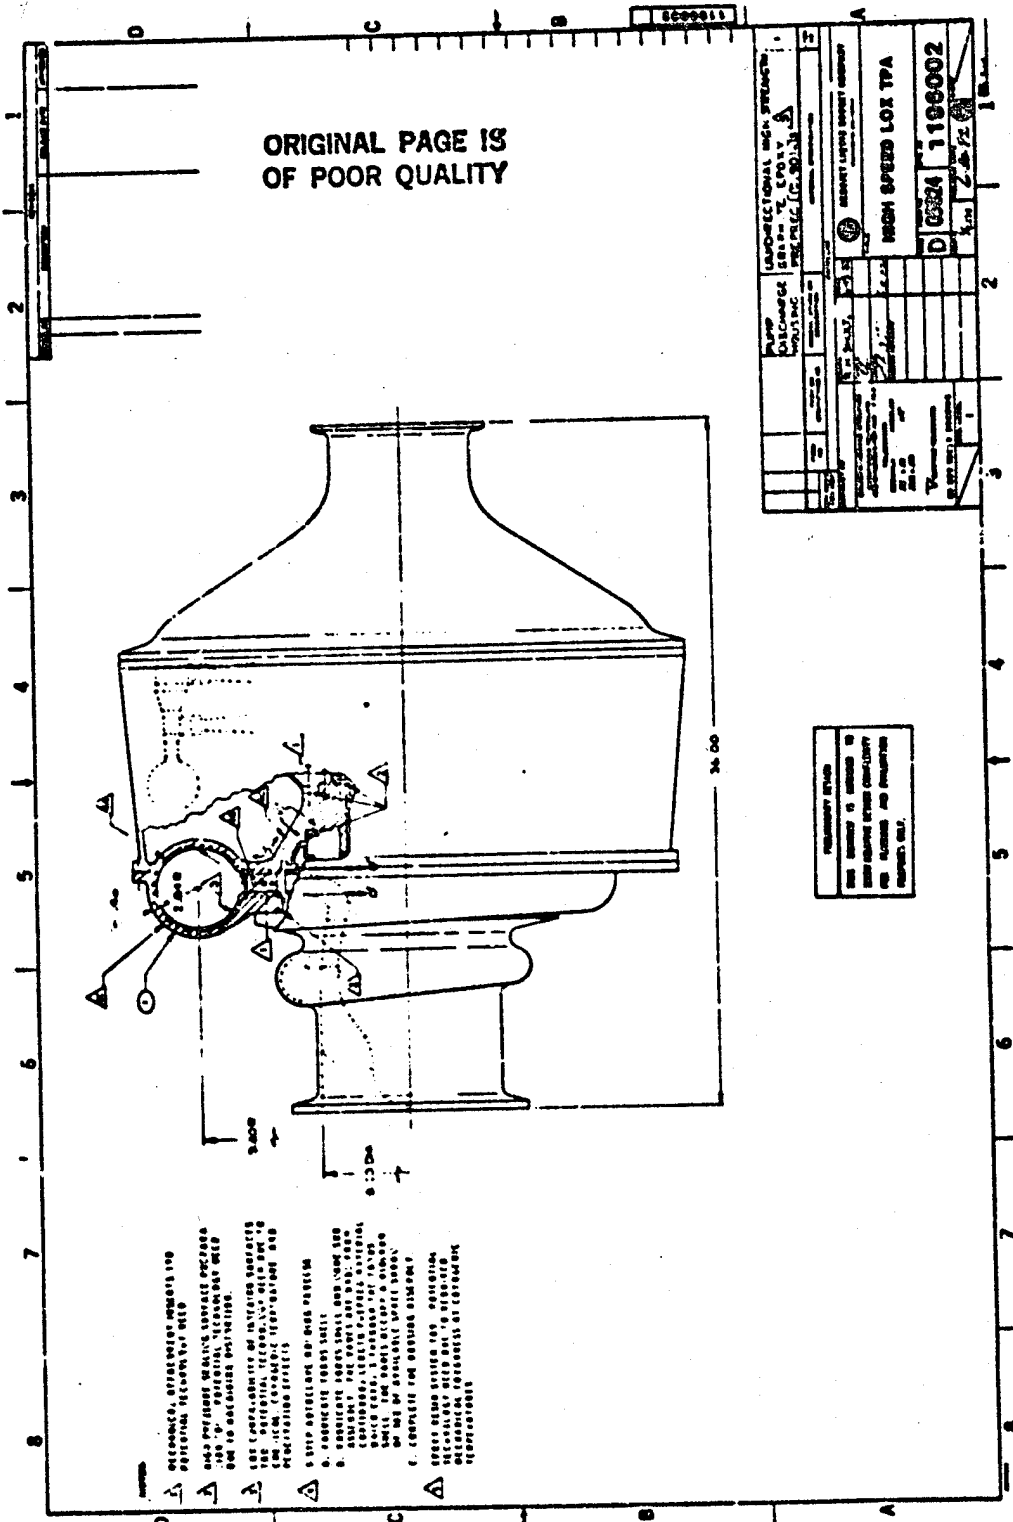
High-Speed LOX TPA (ALRC Drawing No. 1196002)
